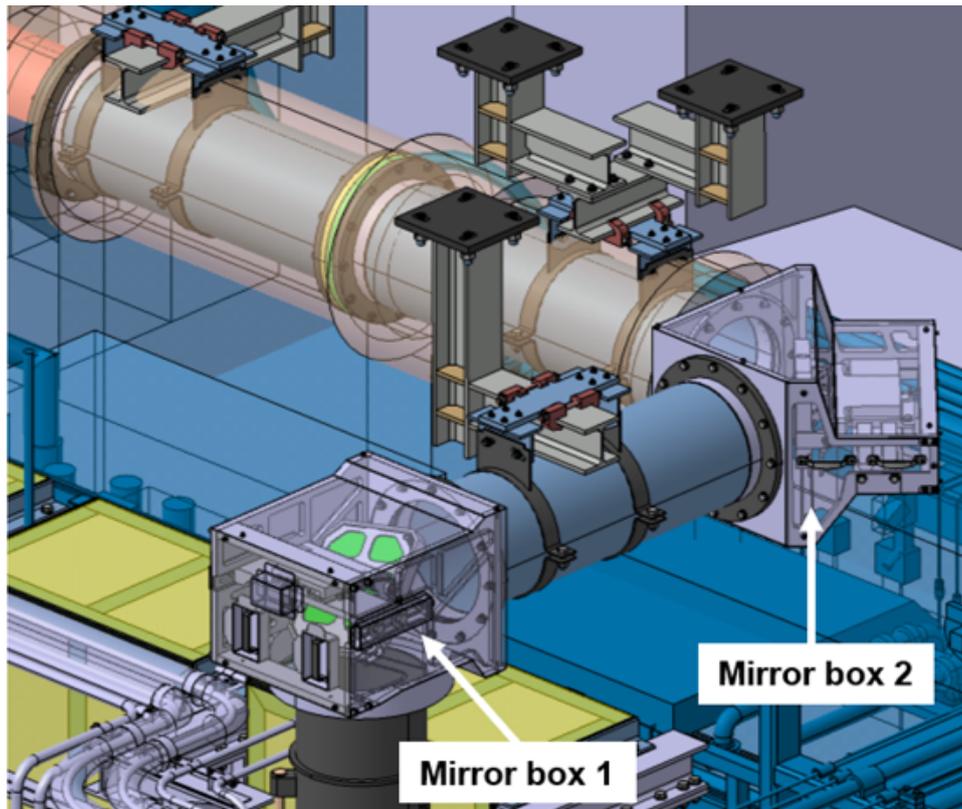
Example of Ex Vessel Optical relay unit (Rough Dimensions Mirror box 1 457 by 457 by 557 mm and Mirror box 2 449 by 698 by 688 mm)
